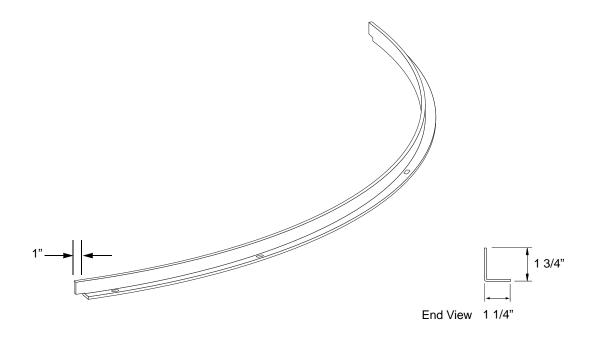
1 3/4" Angle Side Guide, 90° Curve
